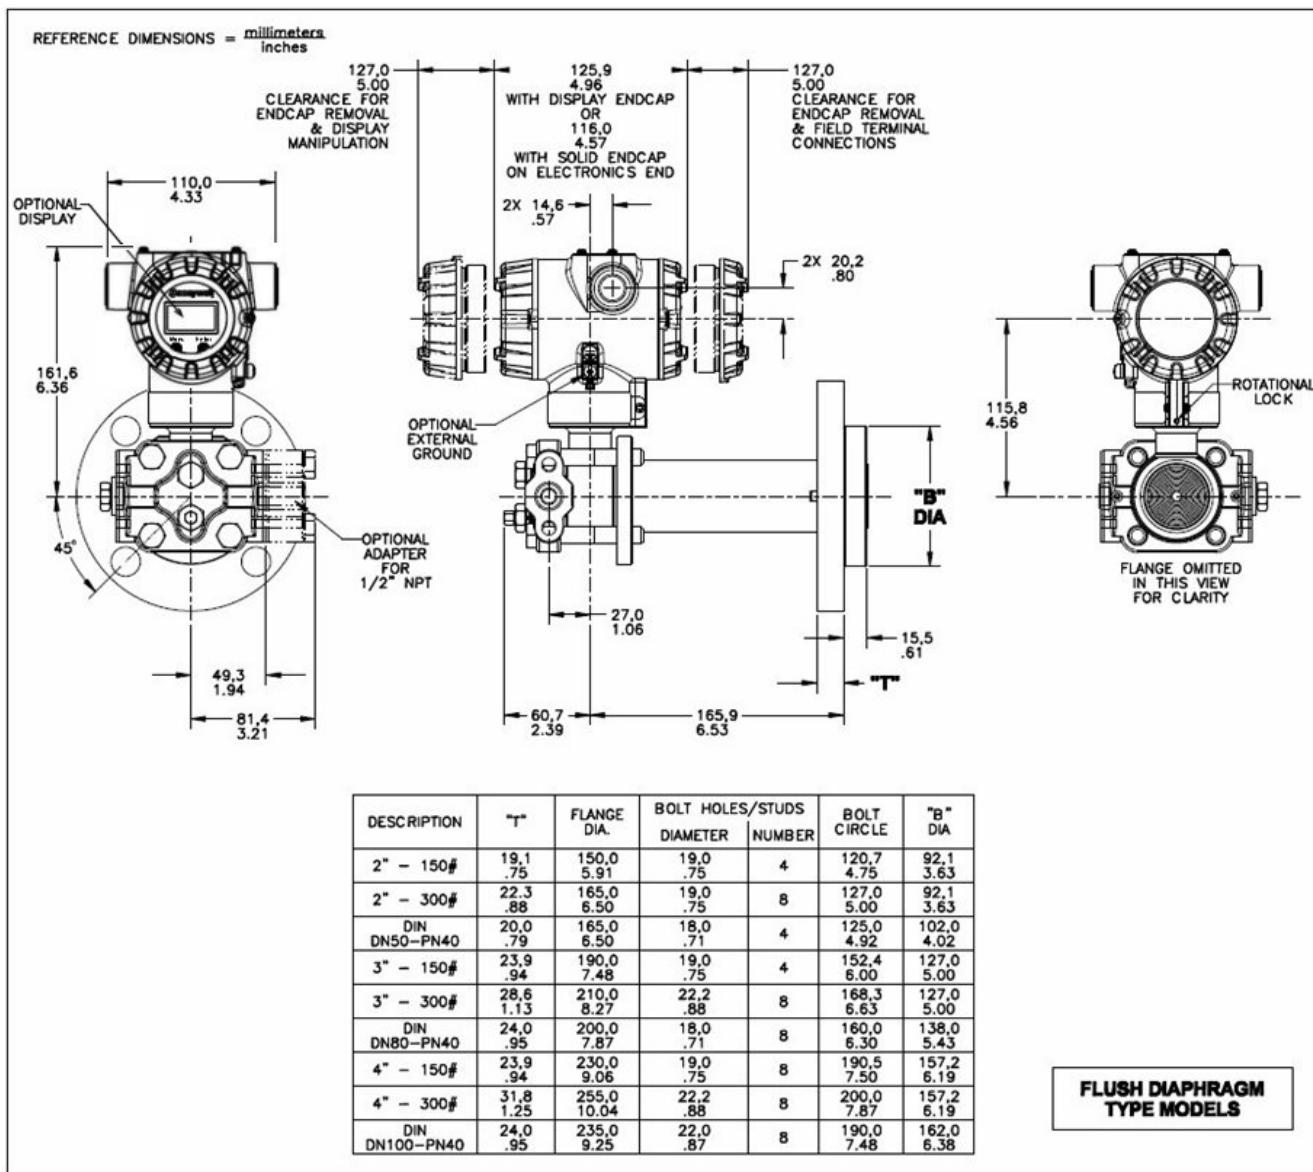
Typical mounting dimensions for flush diaphragm type models STF725 and STF735.
